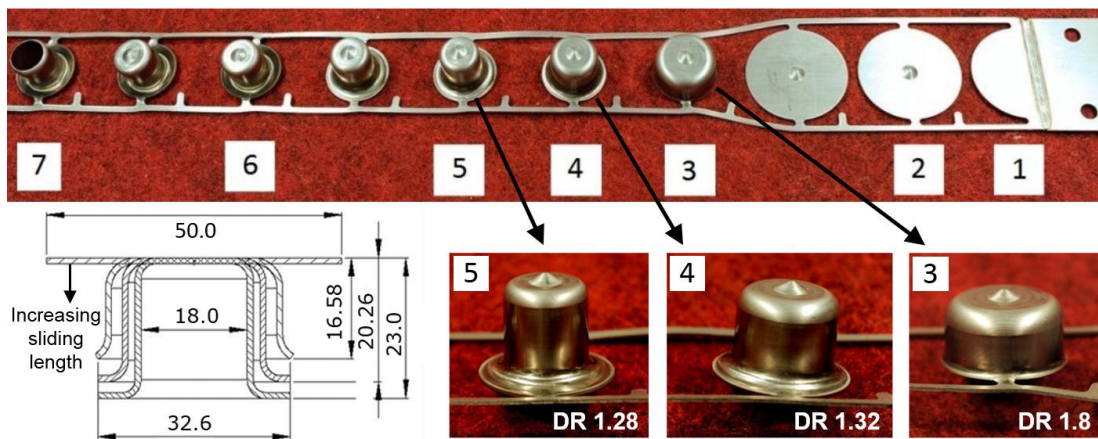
Sheet stamping production layout in progressive dies [37].
